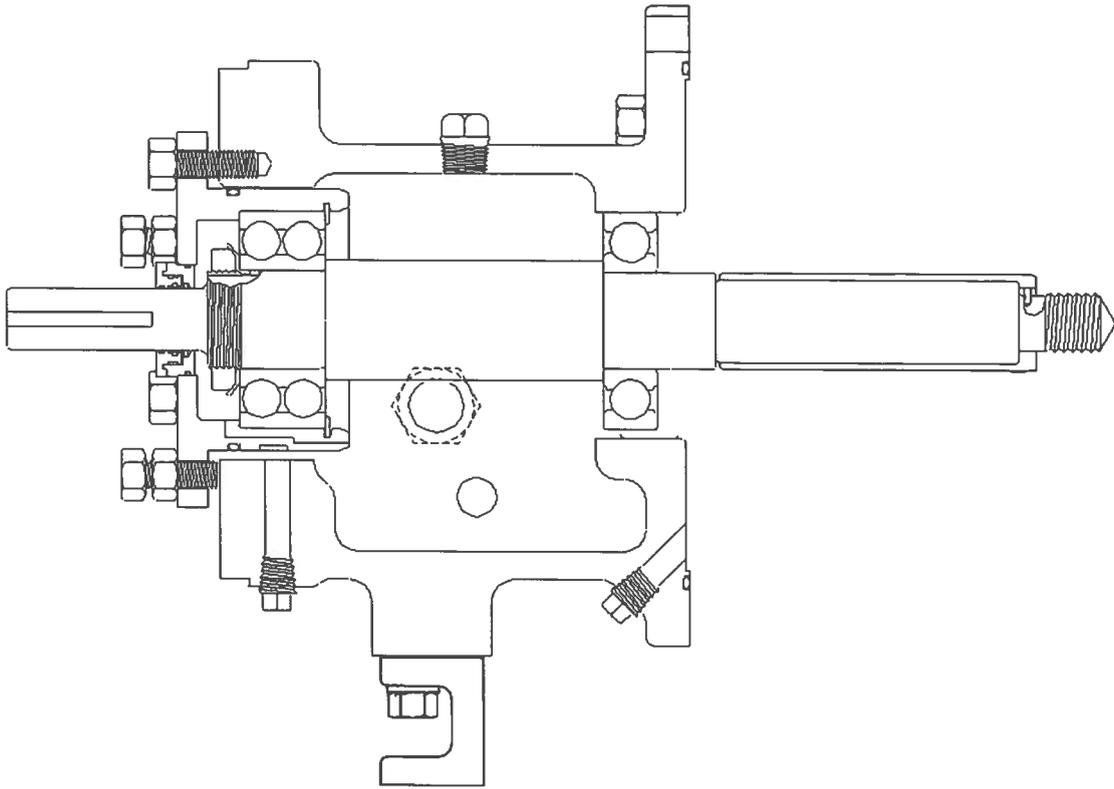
Power end (or frame assembly)
